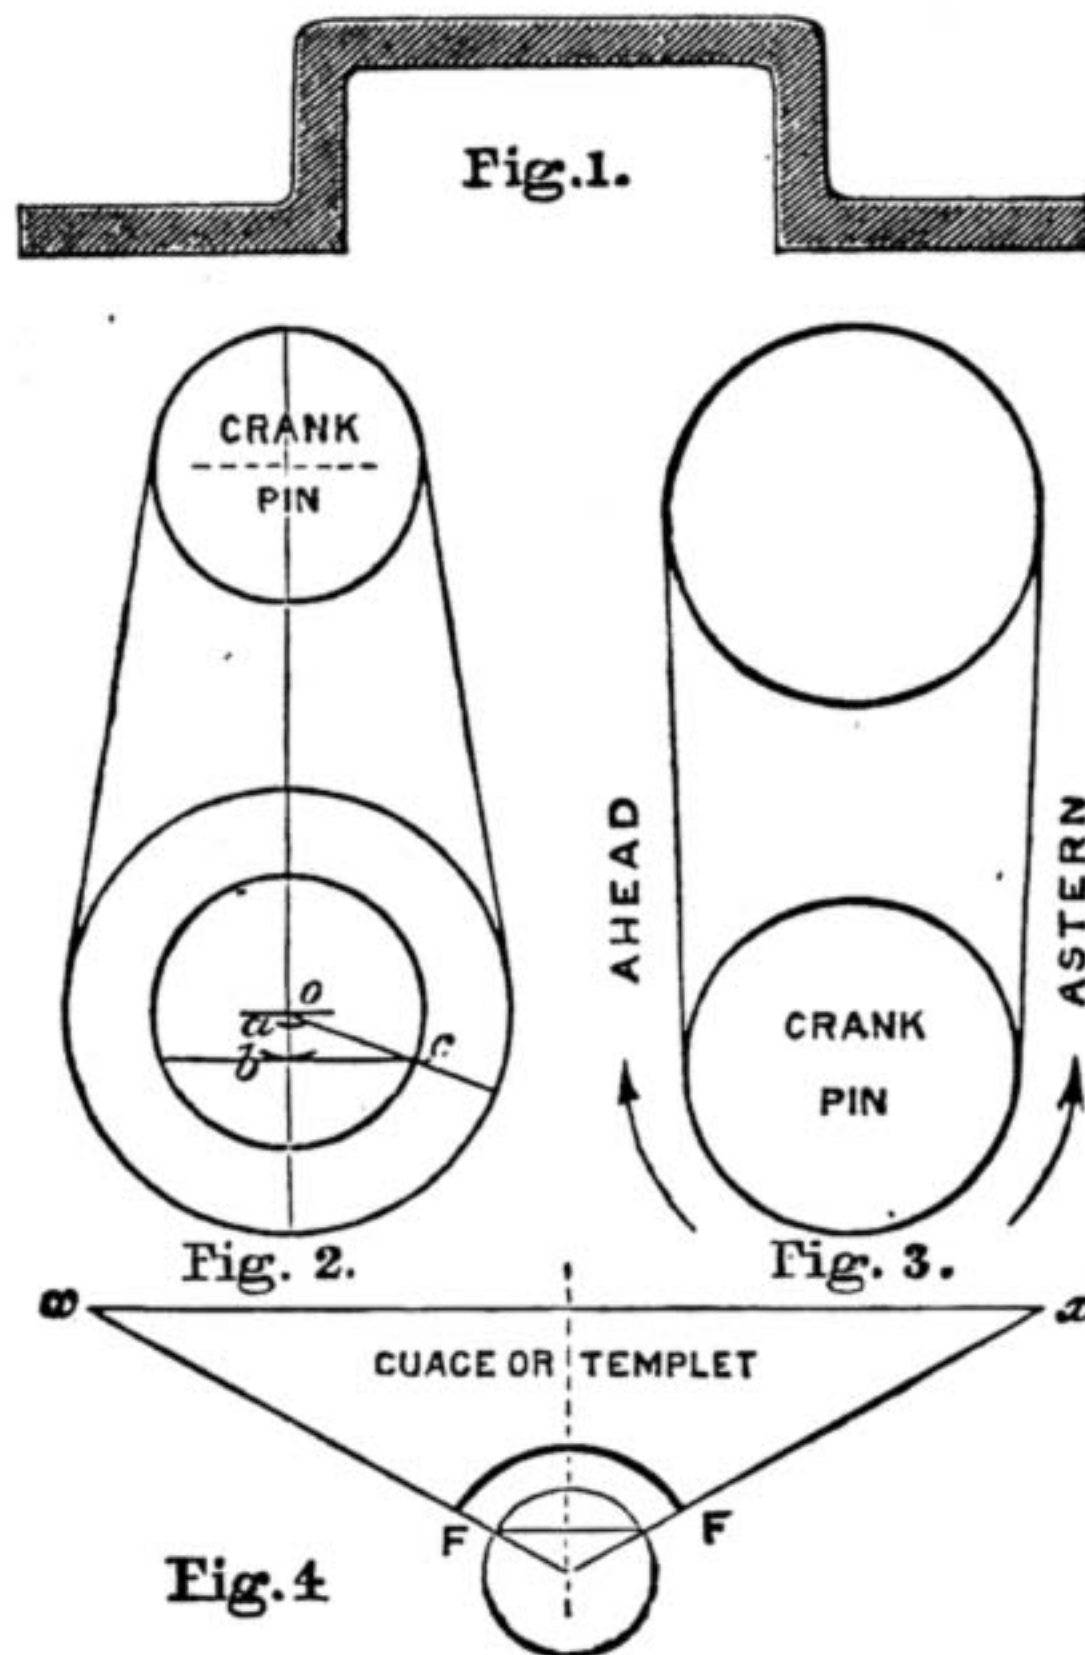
Section of D Slide. Fig. 2.—Plumbing Centre of Crank Pin over Centre of Crank Shaft, Centre Line of Eccentric. Fig. 3.—Plumbing Crank Pin for Marine Engine; Shaft to be Plumb, Pin down. Fig. 4.—Gauge or Templet; when tried upon Shaft for Marking Centre Lines, *xx* to be levelled by Spirit-Level.
